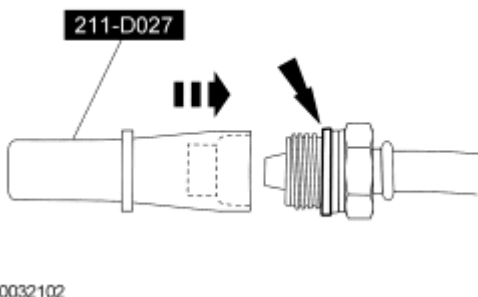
Installing Teflon(R) Seal Using Special Tool (211-D027)
